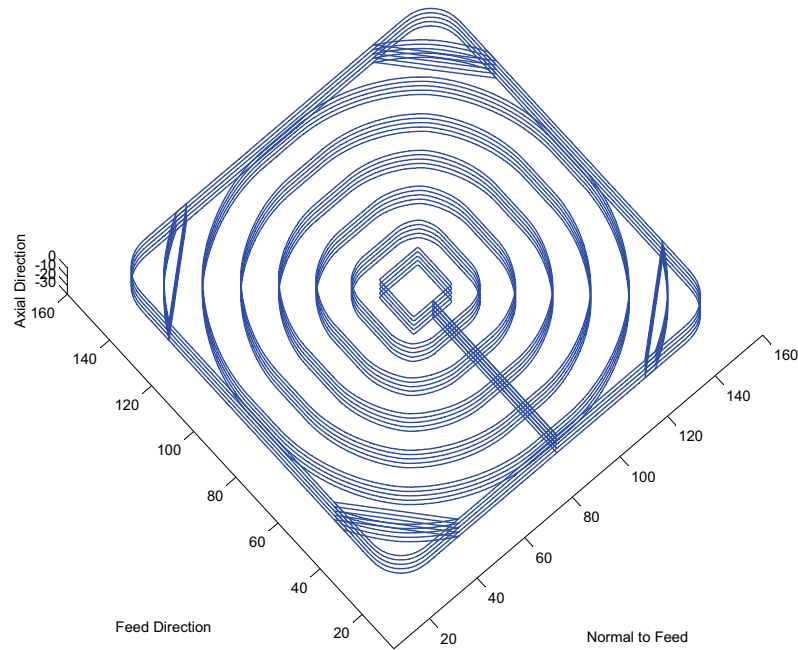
Complete constant engagement and smooth toolpath for pocket milling
